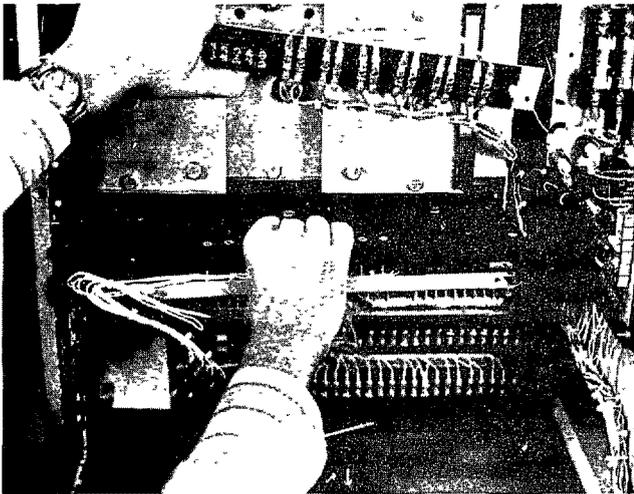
PRESS-PAK SCR HEAT SINK (TOP VIEW)
